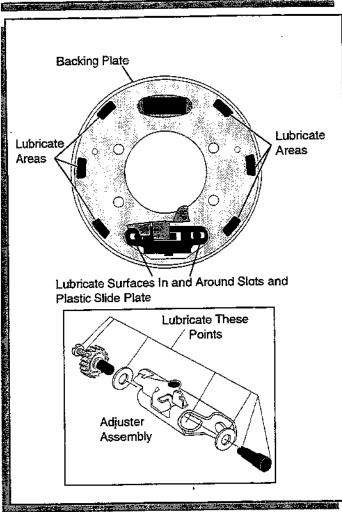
Lubricating Backing Plate and Adjuster Backing Plate Installation
